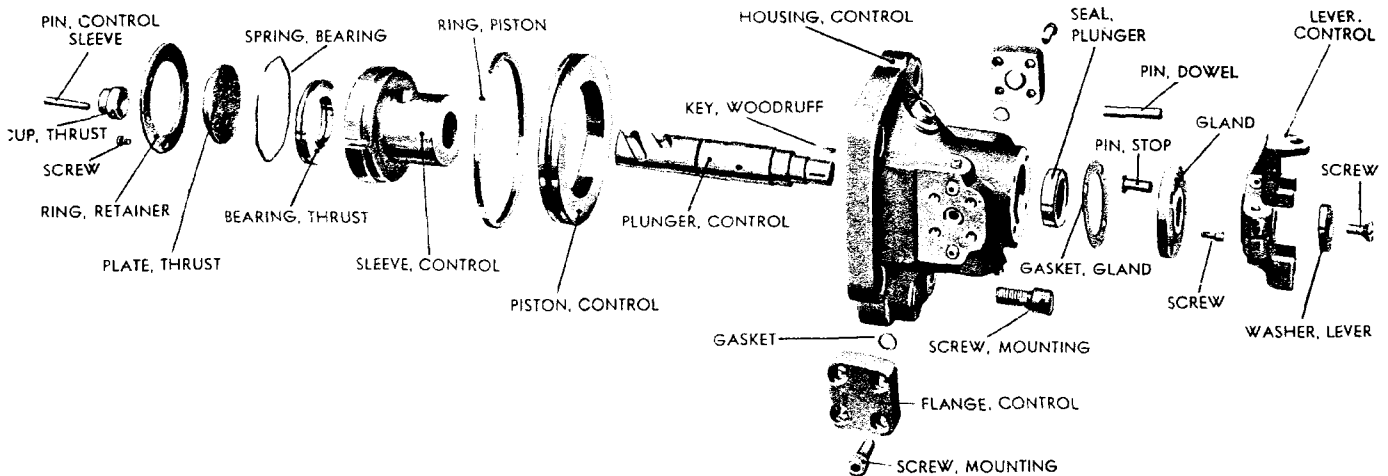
Pump Hydraulic Servo-Motor Lever Control, Assembly, Exploded View
